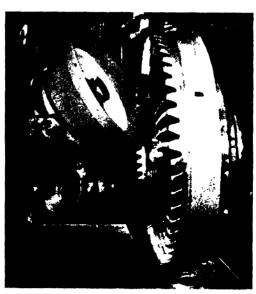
Grinding a Hardened Zerol Gear on the Gleason No 14. Gear Grinder. The Machine is also Used for Spiral Bevel and Hypoid Gears
